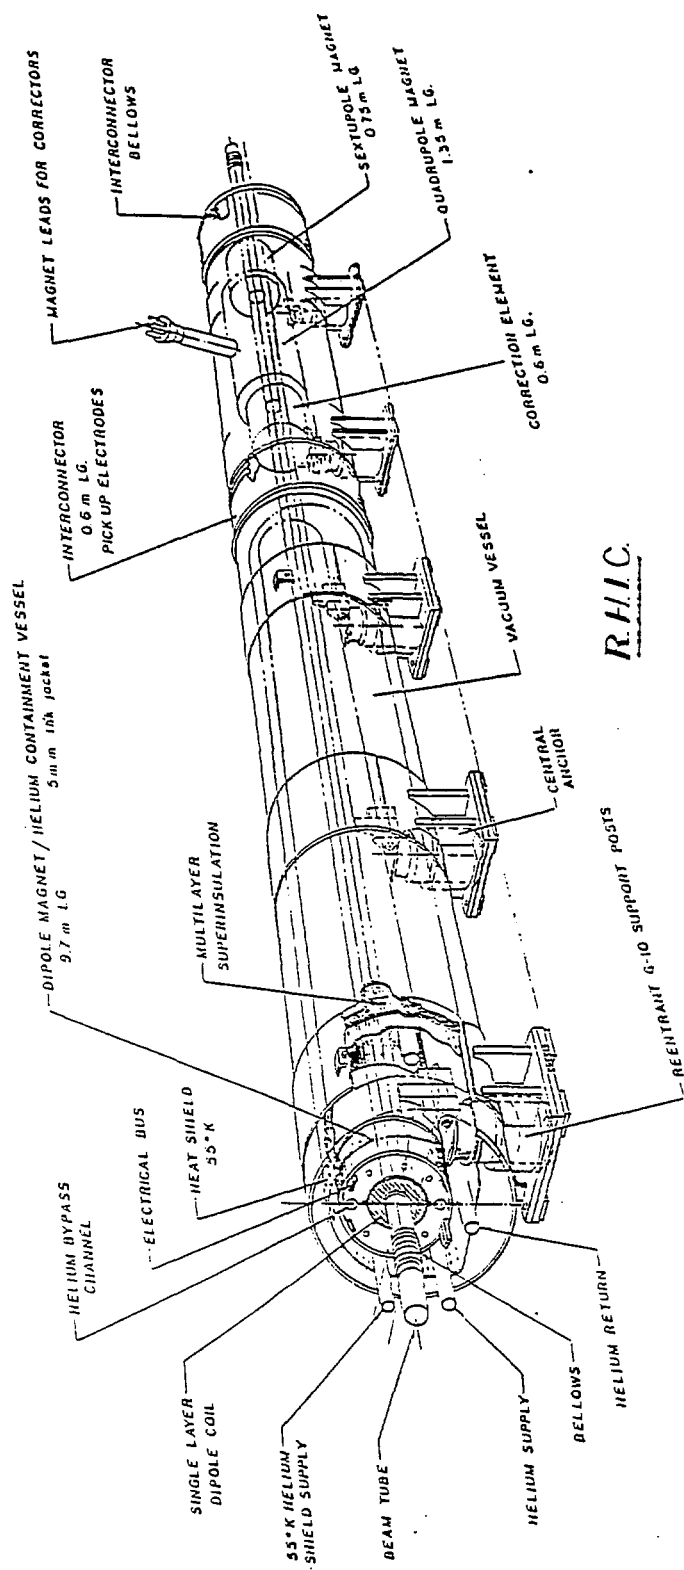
RHIC magnet assembly: The drawing shows a half-cell of the arc magnet lattice, including a dipole, corrector package, quadrupole and sextupole magnets enclosed in their cryostat.
